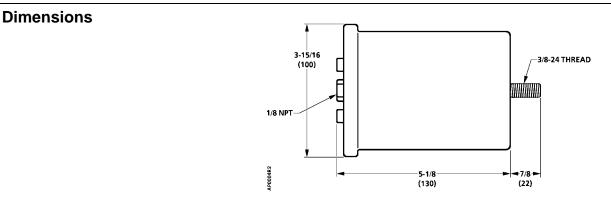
No. 3 Pneumatic Damper Actuator Dimensions. Dimensions are in Inches (Millimeters).
